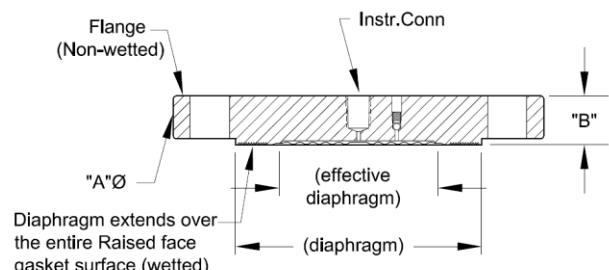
Approximate vertical mounting dimensions for Remote Seal Transmitter
